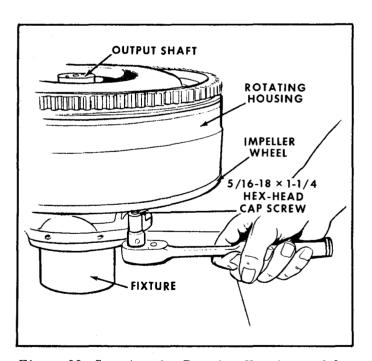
Securing the Rotating Housing and Impeller Wheel together.
